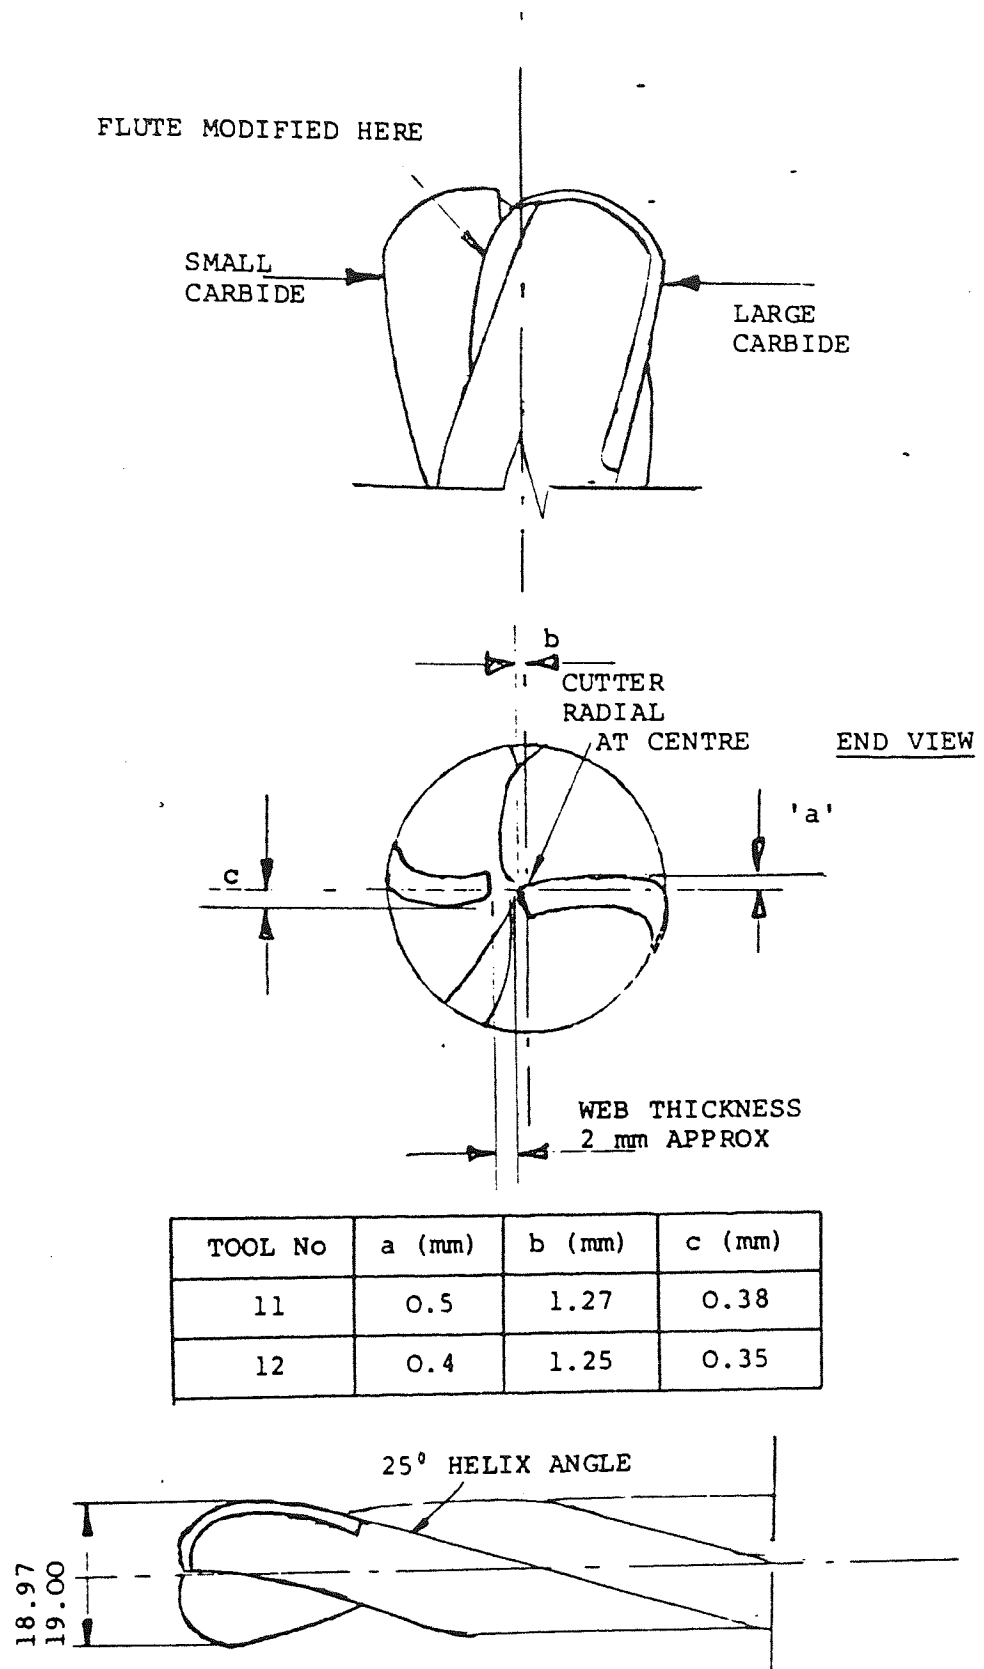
MODIFIED BALL ENDED CUTTER -PROTOTYPE DRILL N03
